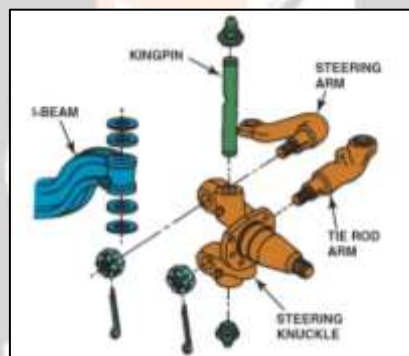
A kingpin is a steel shaft or pin that joins the steering knuckle to the suspension
